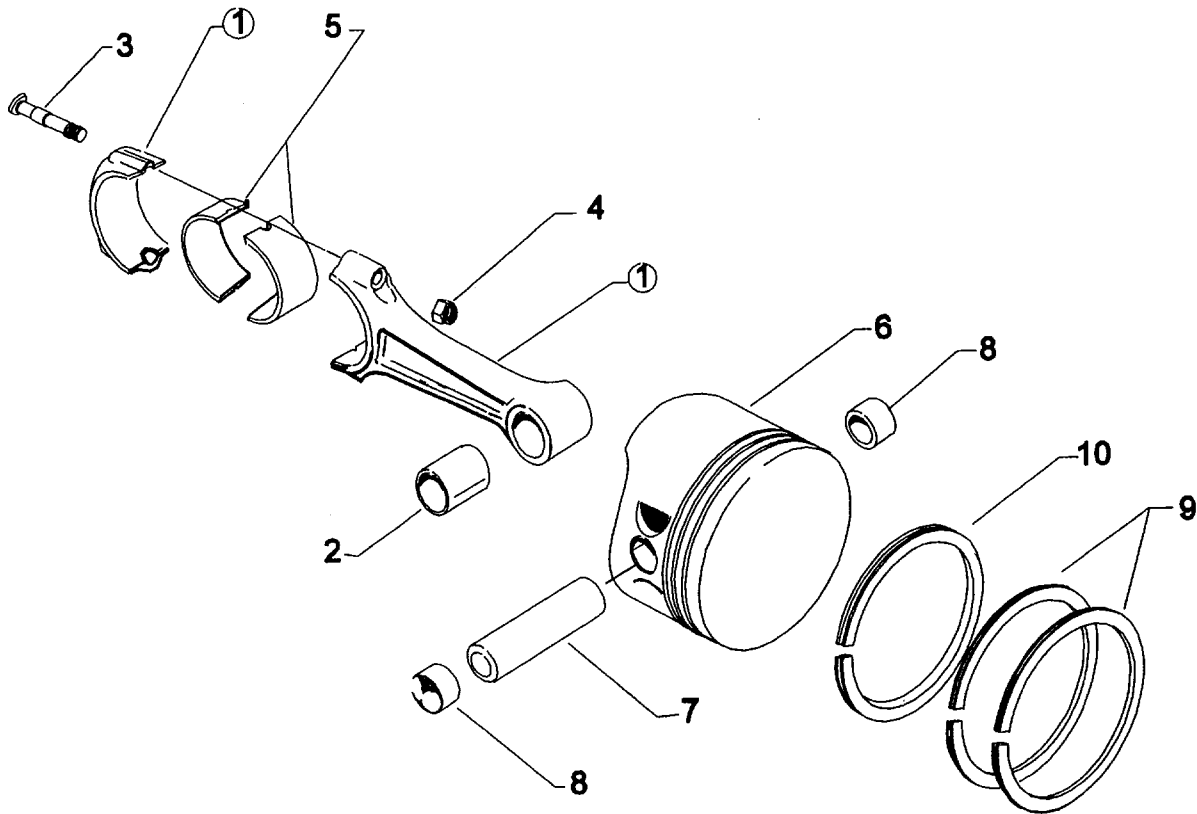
CONNECTING RODS, PISTONS AND RING ASSEMBLIES
